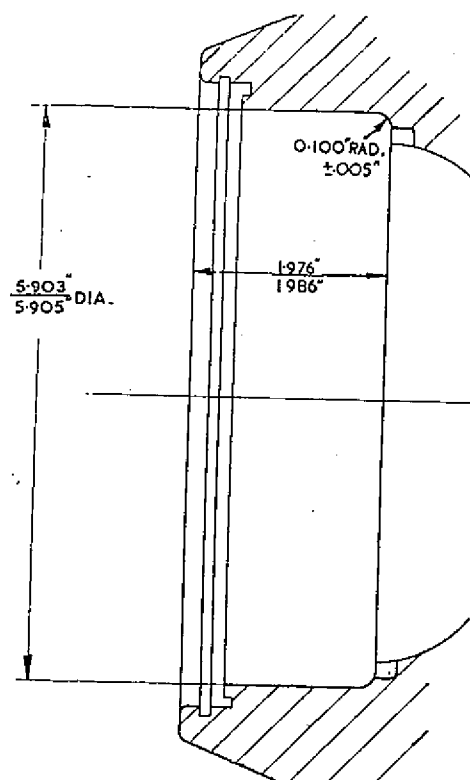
Dimensions for machining bearing housing. RP.5/3
